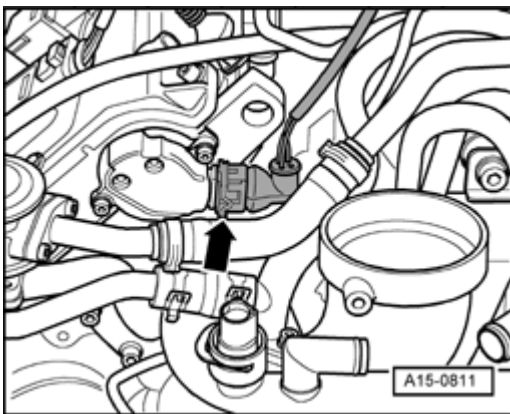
Disconnecting Electrical Harness Connector At Camshaft Position (CMP) Sensor 2 G163
